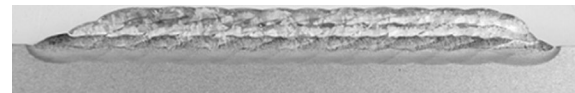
Typical cross section of three layer deposited weldment
